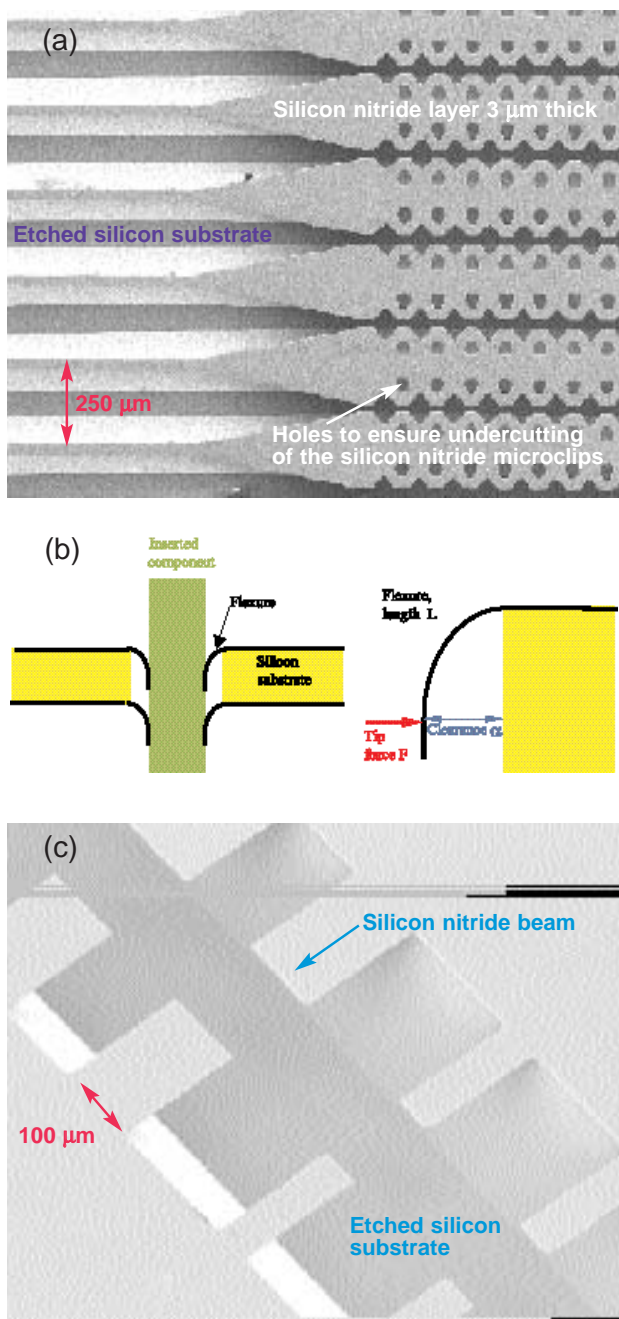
Elastic component fixtures: a) Si_3N_4 clips for de-mountable fiber attachment; b) schematic of component fixture; c) component fixture in Si_3N_4 .
